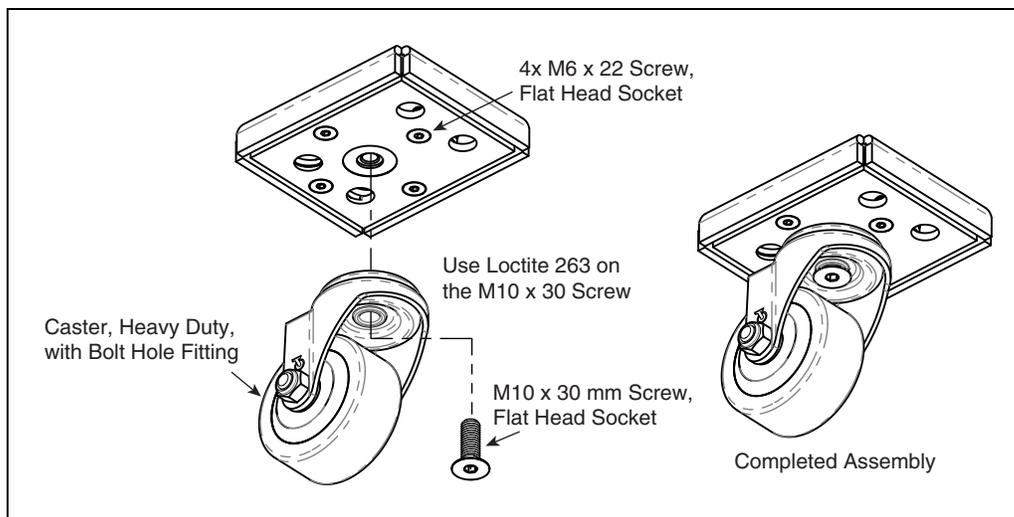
LD Platform Cart Transporter Caster Replacement
